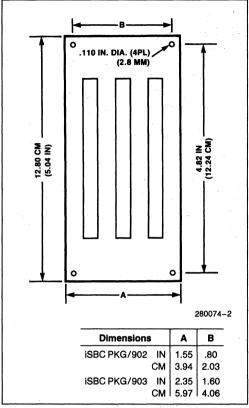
iLBX™ II Board Dimensions (iSBC® PKG/903 Shown)
